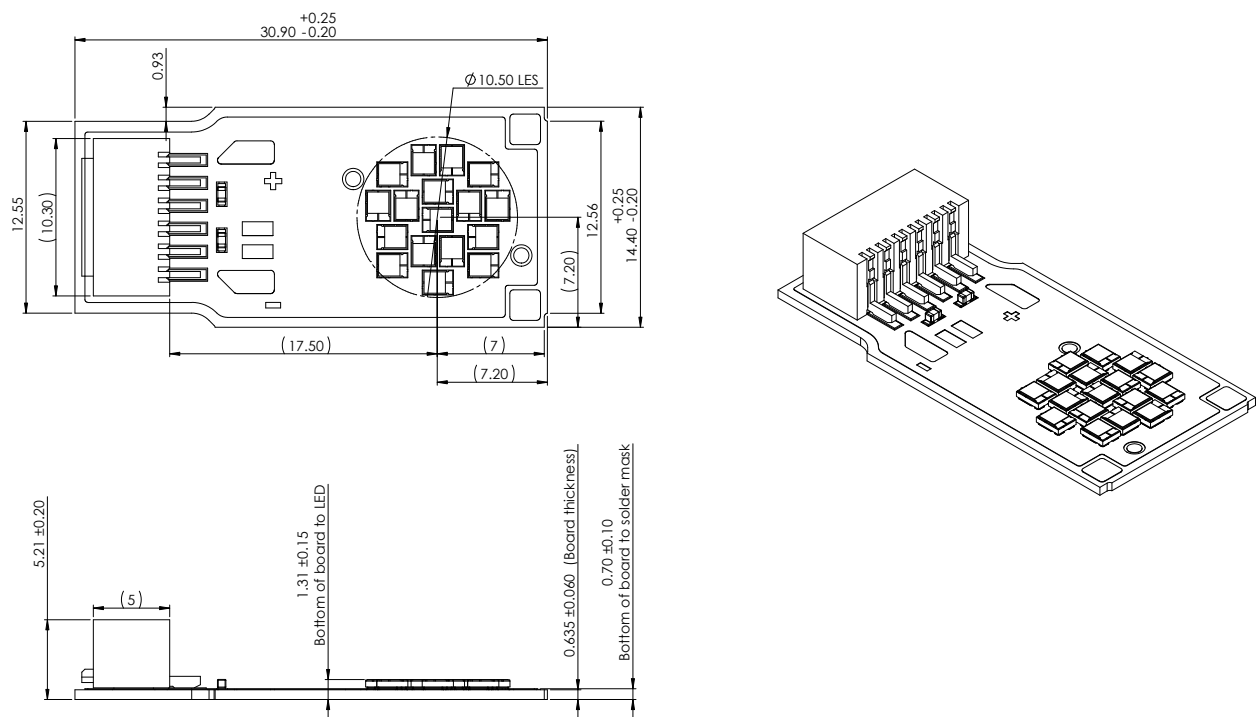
Package outline drawing for LUXEON S2000/LXSx-PWxx-0017.
